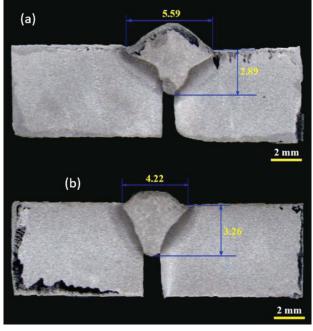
Weld bead profile of: a) AW, b)FW
